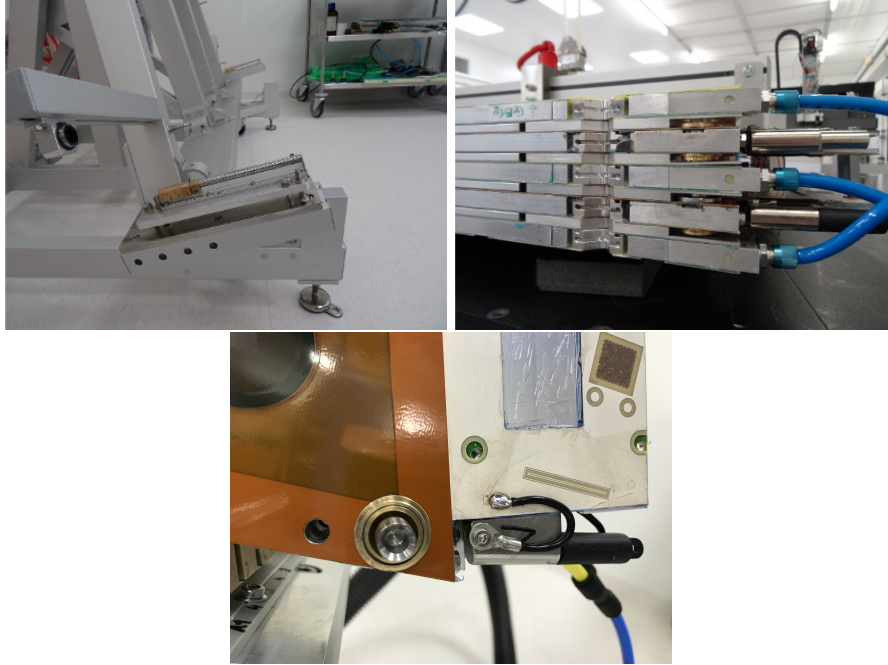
Left: Reference tracks on the assembly station on which lie the V-shape reference inserts of each panels during stacking. Right: Detail of the reference inserts in an assembled module. Bottom: View of the mechanical coupling between Stereo and Eta readout panels through precision pin and insert.
